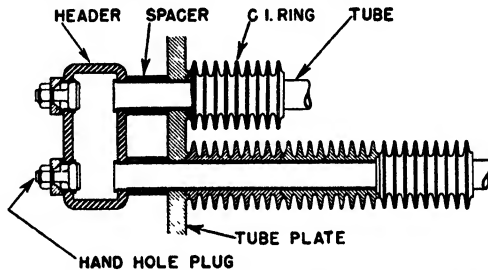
Section of Foster Wheeler economizer, showing cast-iron gilled rings.
